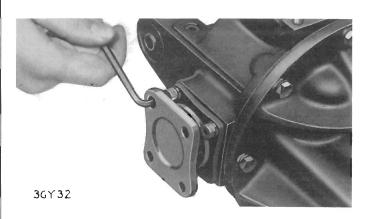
Using an Allen key to remove the screws securing the inner axle shaft
